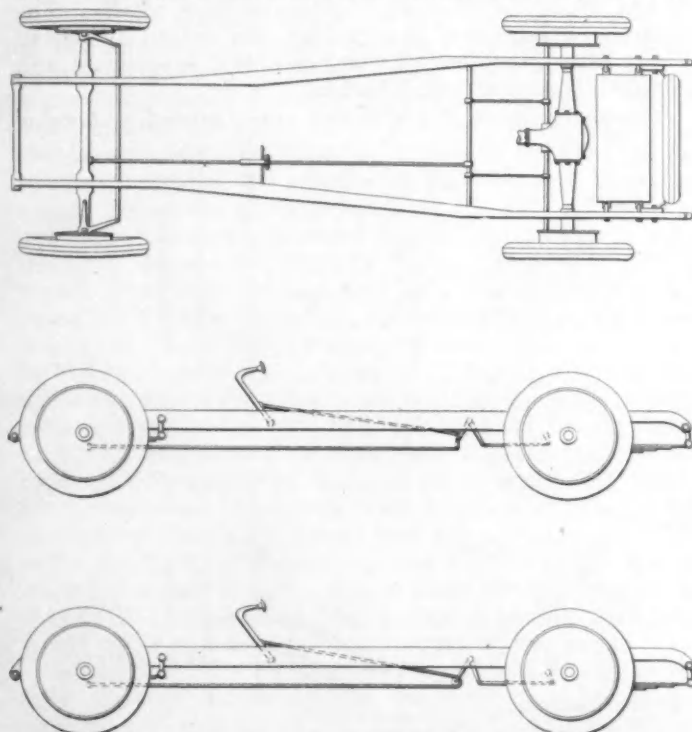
PLAN AND ELEVATION VIEWS SHOWING THE METHOD OF CONNECTING THE FRONT-WHEEL BRAKE WITH THE CONVENTIONAL REAR-WHEEL TYPE
